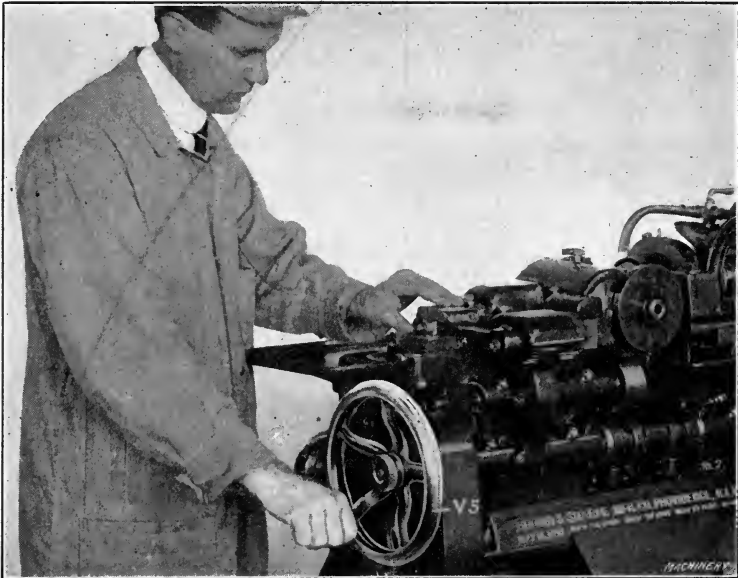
Method of Operating Machine by Hand when Making Adjustments
